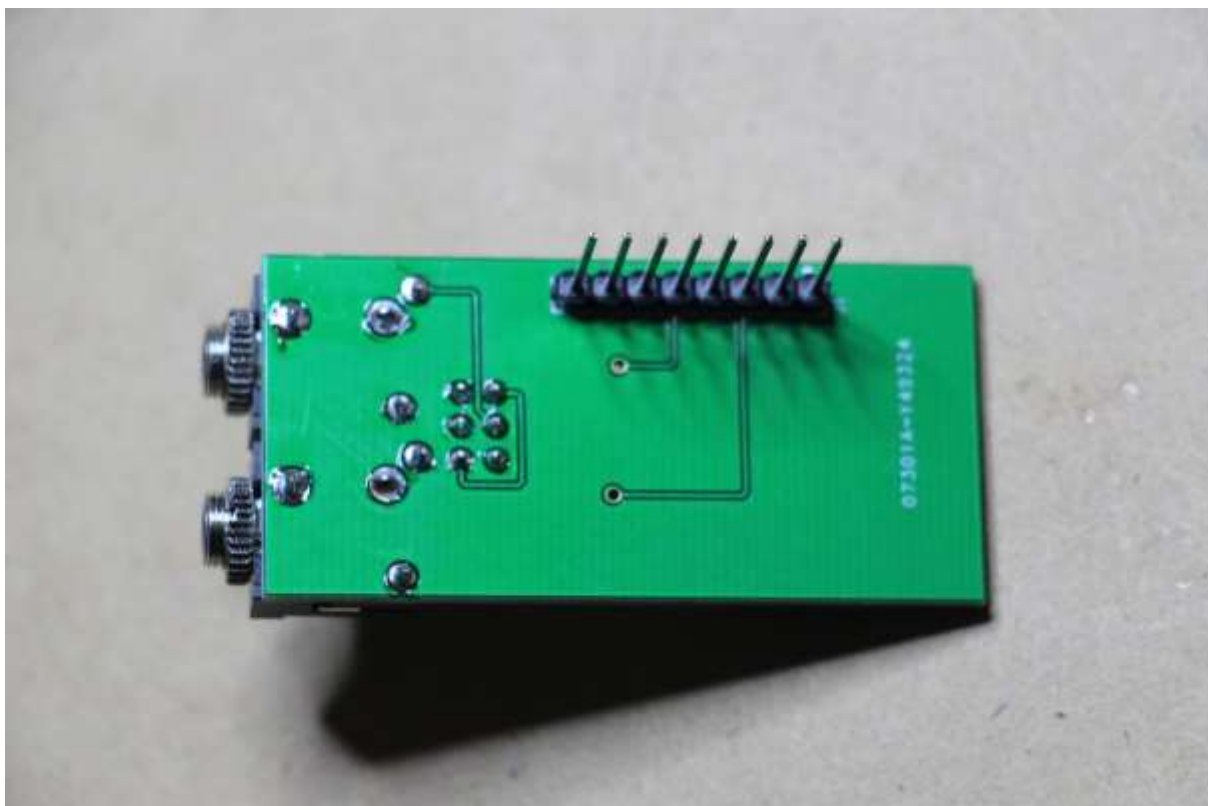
Frequency Sense Board with all components on bottom of PCB fitted.
